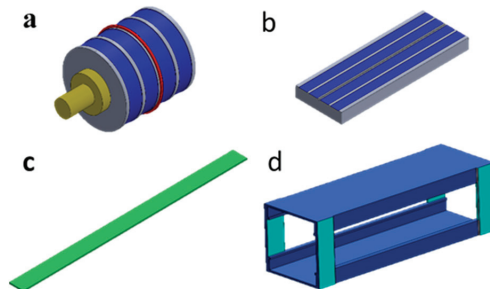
Model of components: (a) pinion; (b) rack; (c) flexible strip; (d) casing.
